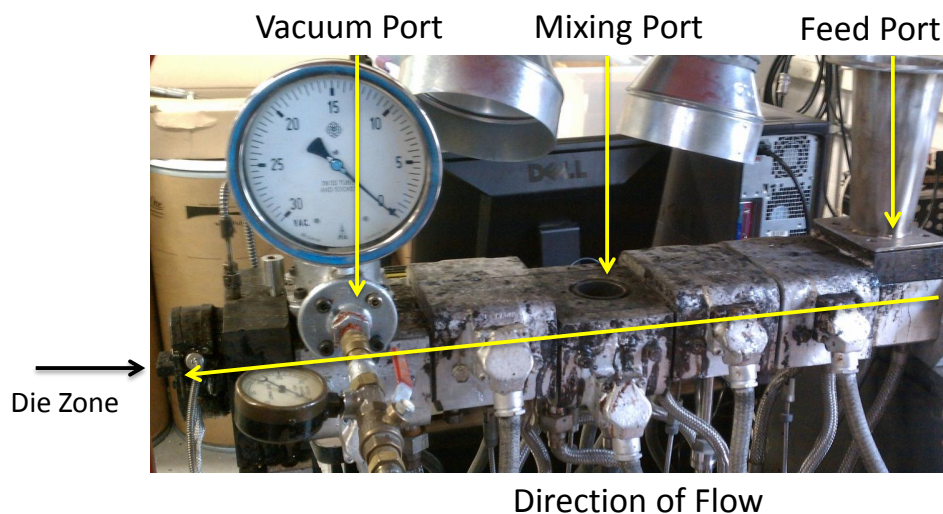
Coperion ZDSK-28mm twin-screw extruder.
